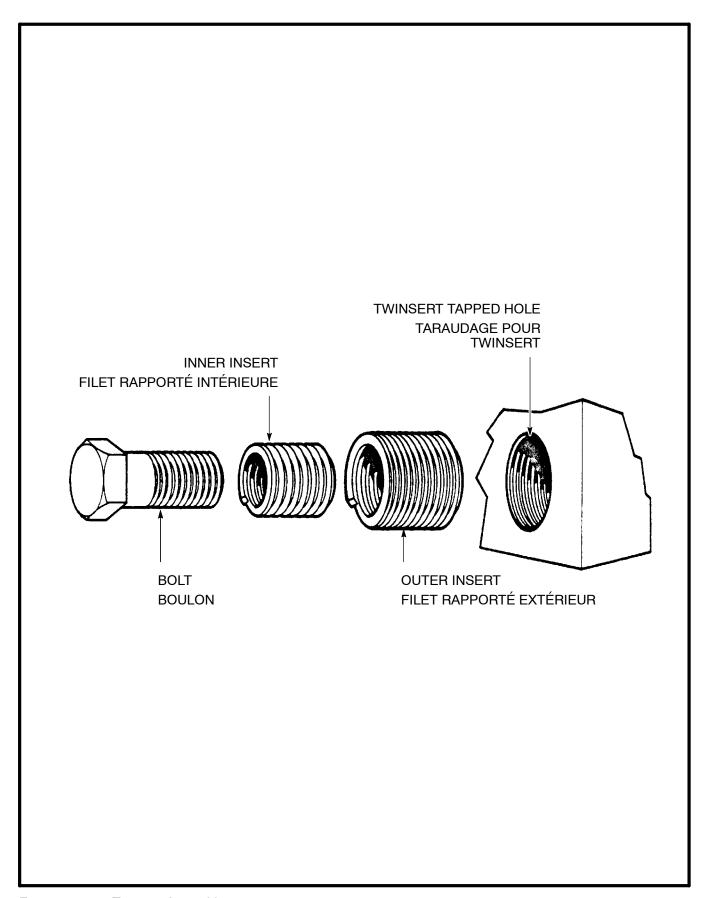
Twinsert Assembly Ensemble Twinsert
